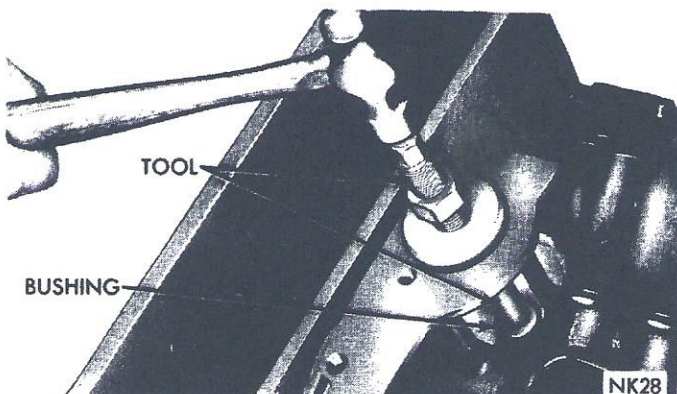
Installing Distributor Drive Shaft Bushing With Tool C-3053
